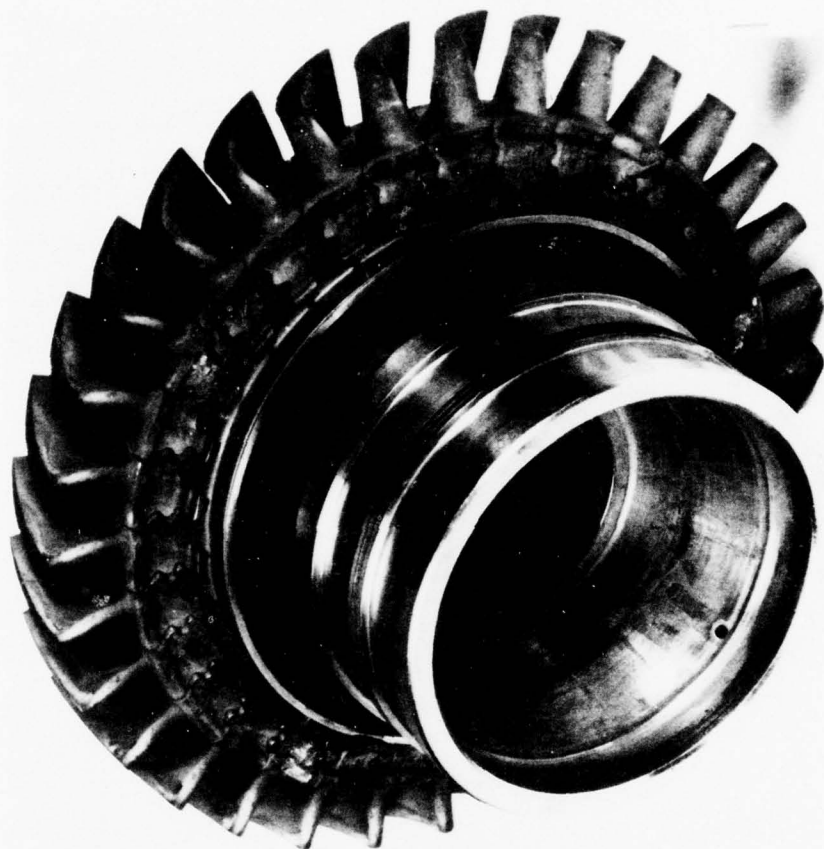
Instrumented Gas Producer Turbine Rotor - Front View.
